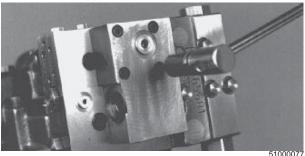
Install E1•E2 or F1•F2 Control Valve Housing
